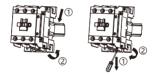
Installation and disassemble method of CJX2s/CJX2i-40~95
